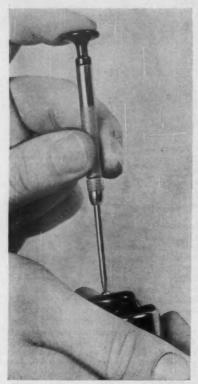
One technique for working with subminiature parts. A jeweler's screwdriver should be used on small machine screws.
